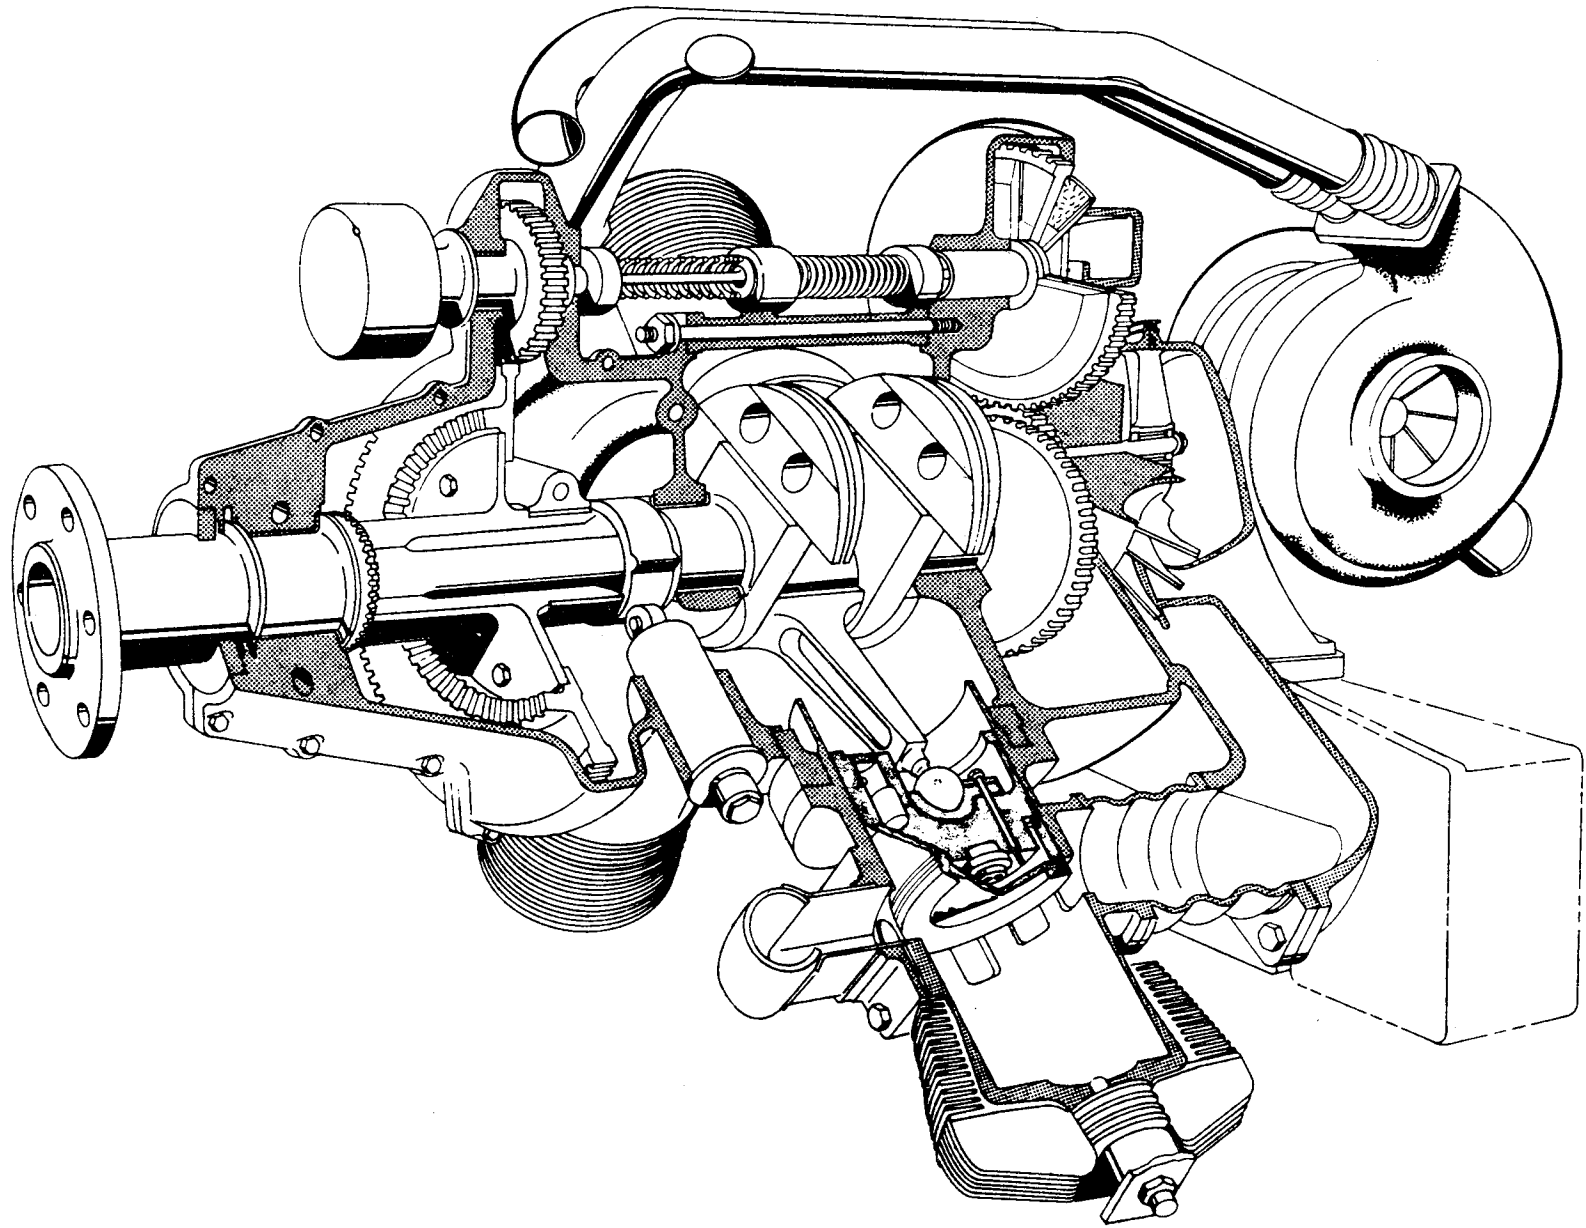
149 kW, 4-CYLINDER DIESEL AIRCRAFT ENGINE
